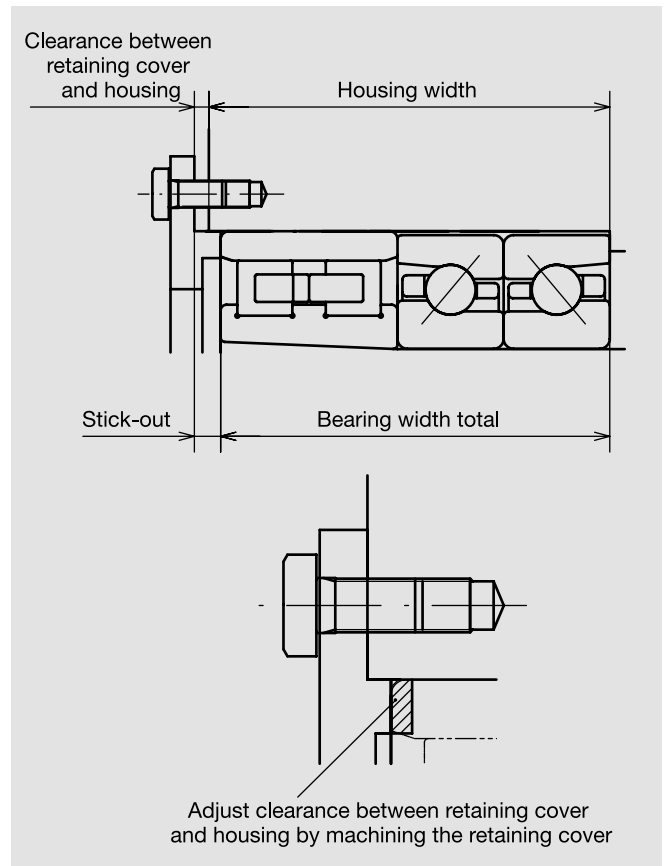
Example of Outer Ring Deformation Due to Clearance Between Retaining Cover and Housing
